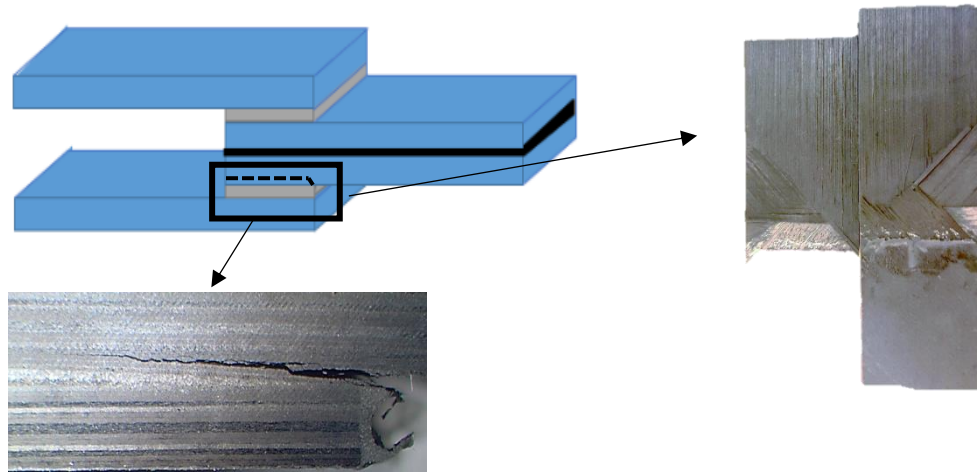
Fracture surface and schematic for 45° QI DLJ
